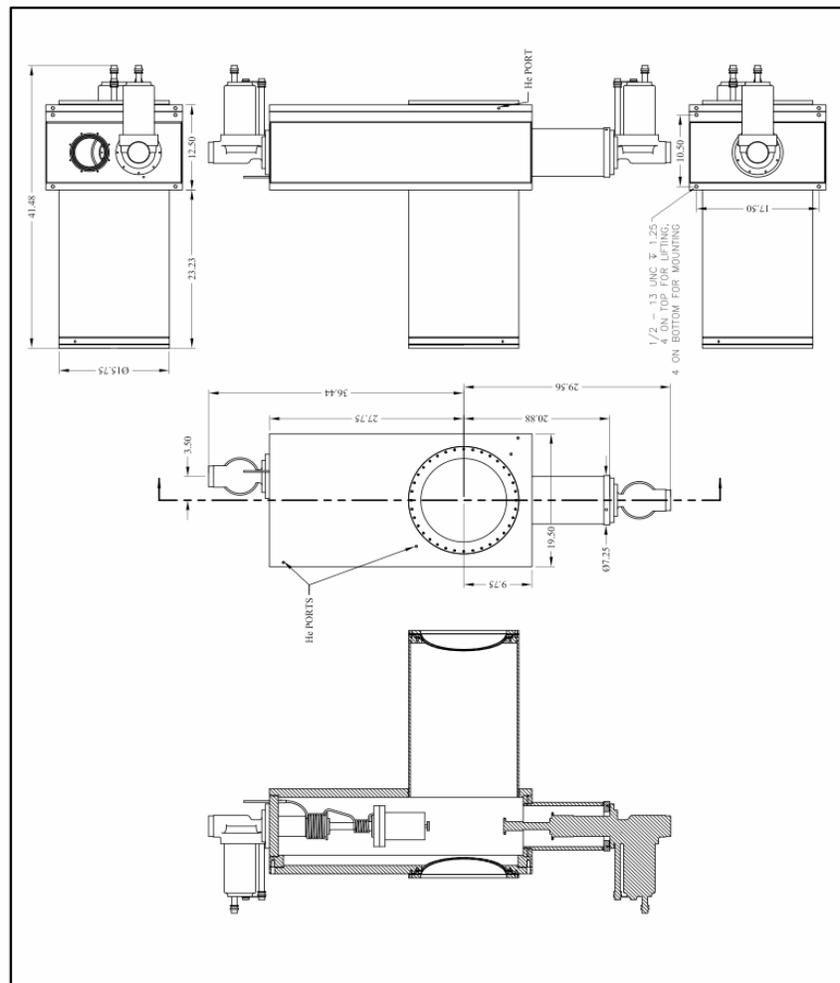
Main target isolation vacuum chamber. The target vacuum chamber includes two cryo-refrigerators, the concave double windows for the neutron beam entrance and exit, and the two-part main vacuum chamber with a horizontal cylindrical section that houses the hydrogen target vessel and the box section which contains the refrigerator and feed line penetrations along with a removable rear flange for access to the rear (downstream of the neutron beam) end of the chamber. The neutron beam enters at the front of the cylindrical section. The vacuum chamber drawings are available in www.iucf.indiana.edu/U/lh2target/export-files/.
